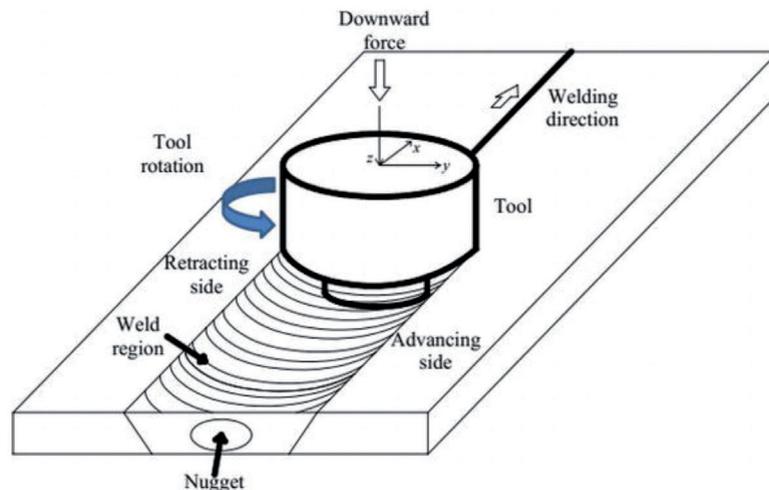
Mechanism of Friction Stir Welding process [3].
